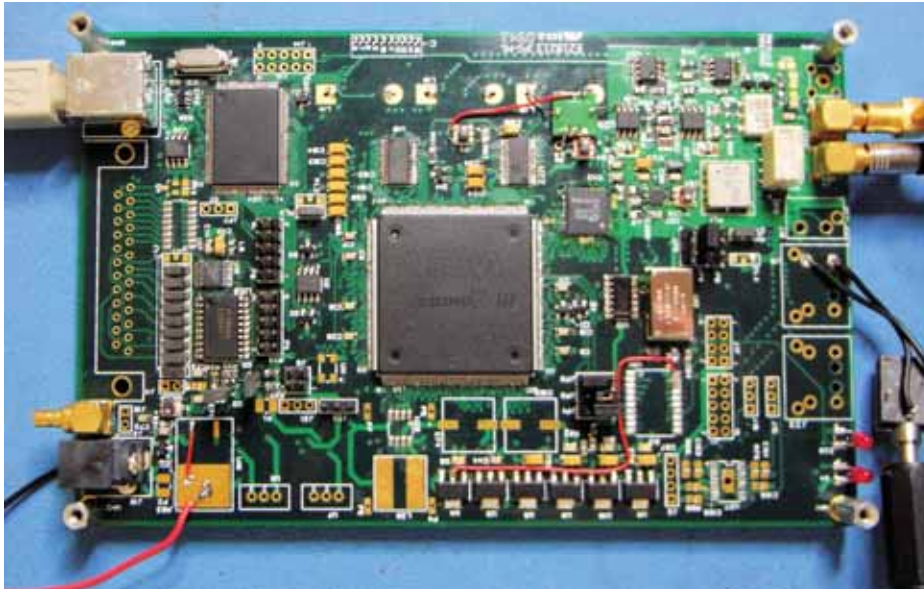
Prototype Hermes PCB built by VK6APH.
